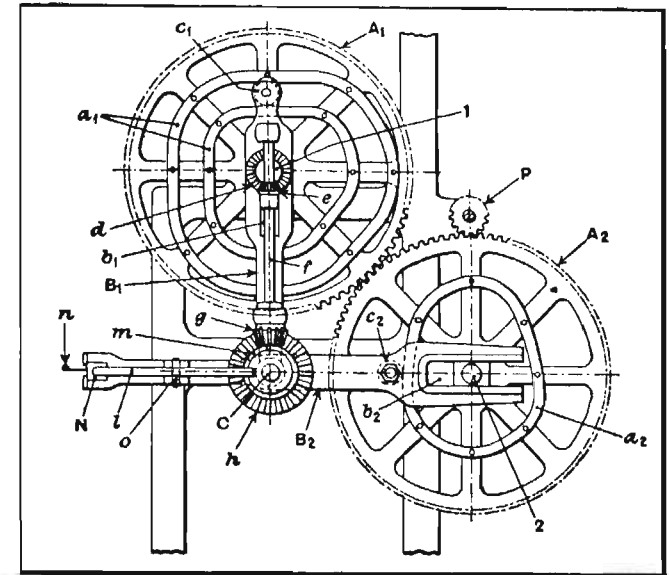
Compound Cam Mechanism Employed on a Net-making Machine.
